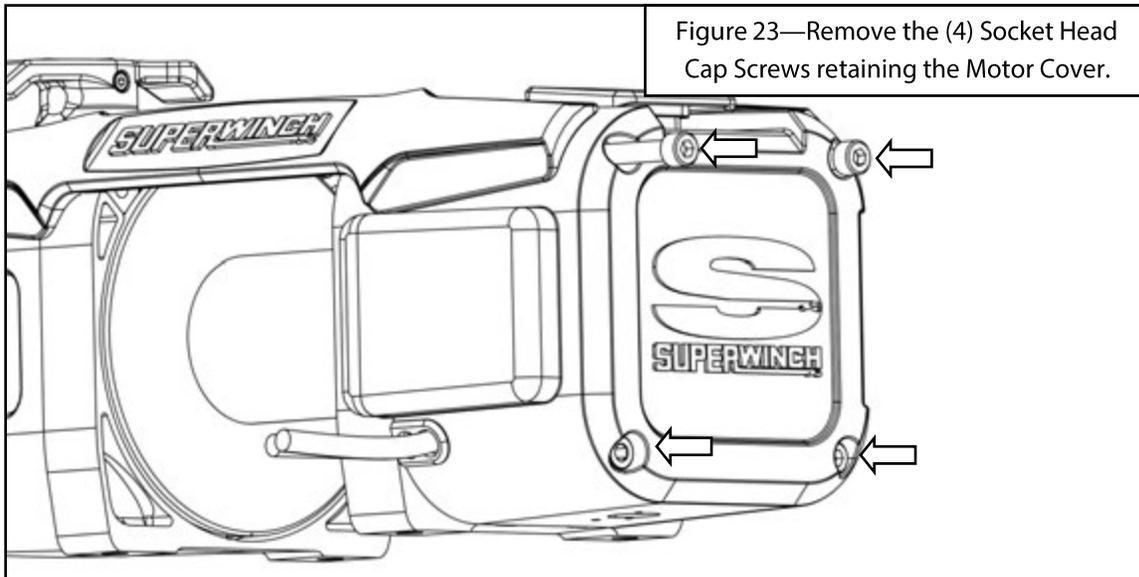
Remove the (4) Socket Head Cap Screws retaining the Motor Cover.
